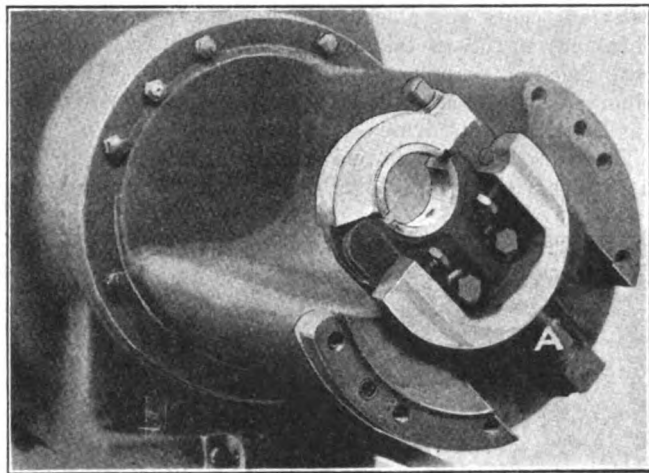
CHUCK FOR CRANKSHAFT LATHE
